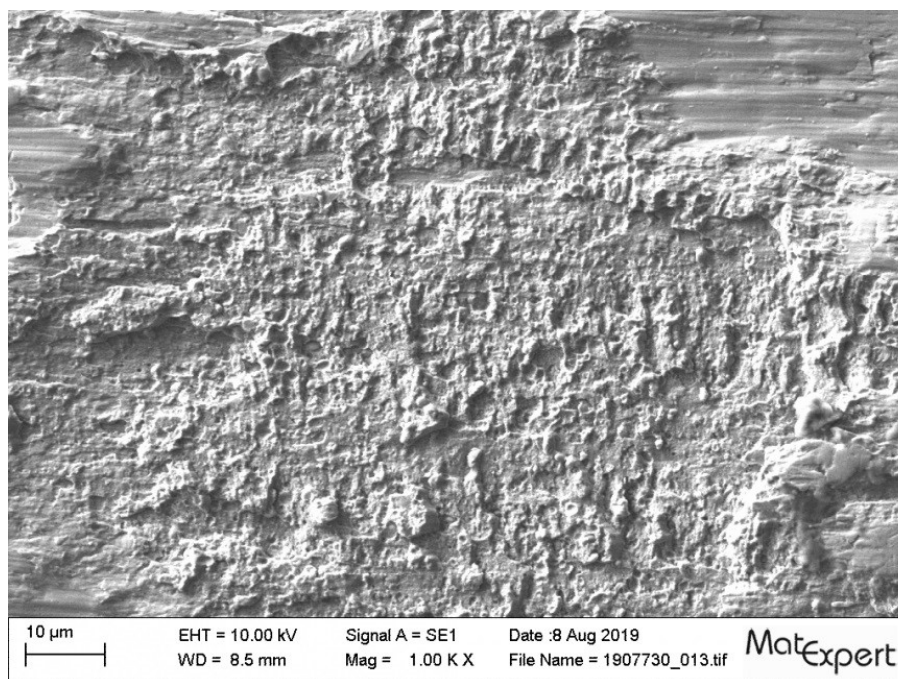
Bearing no. 3 – cylindrical roller with wear.
